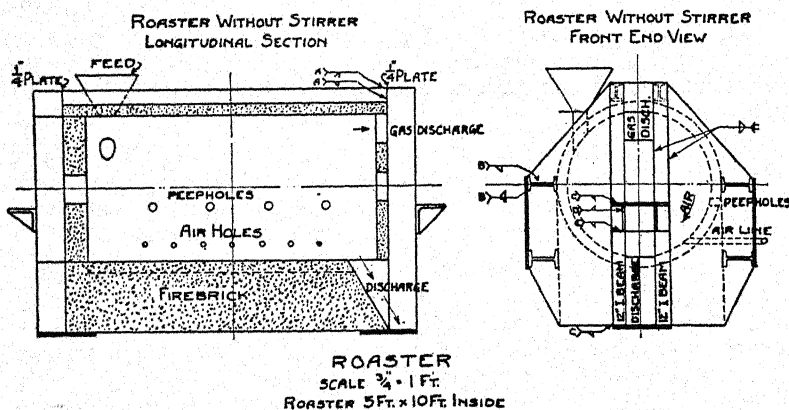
Details of arc welded ore roaster less stirrer.
